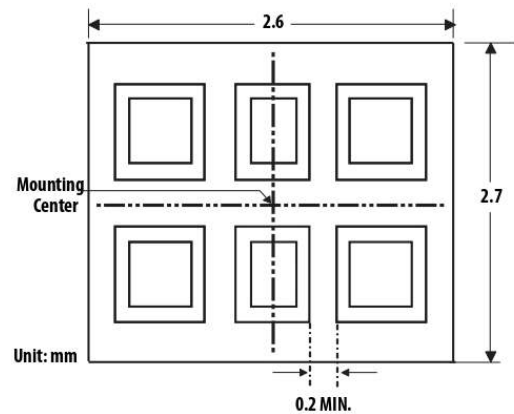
Adjacent Land Keepout and Solder Mask Areas
